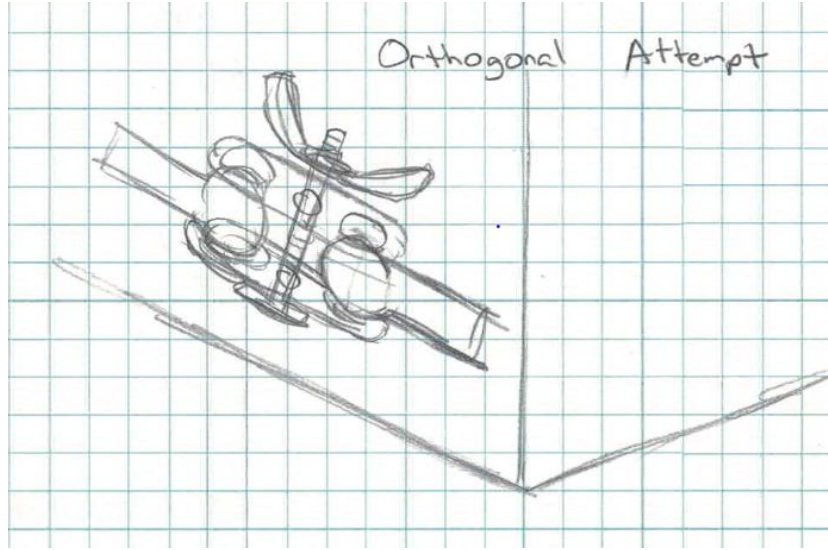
Isometric Sketch of 3D Rotational Angle Adjustment Module
